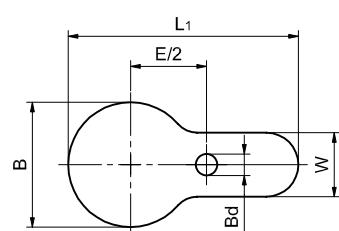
Blanks, Paddle Blanks, Paddle Spacer
